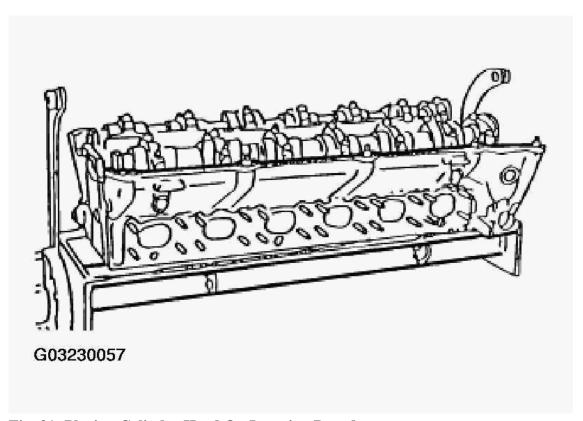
Placing Cylinder Head On Locating Board Courtesy of BMW OF NORTH AMERICA, INC.
